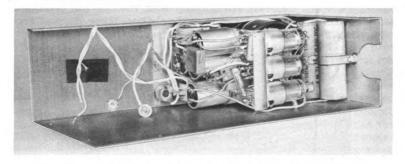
A. Completed Assembly View Showing Subchassis and Battery Mounting Details. Courtesy of Radio & Television News.
